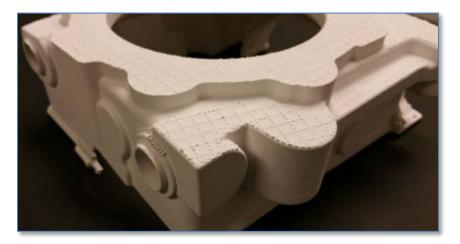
Example of Engineered 3D-Printed Ceramic Mold
